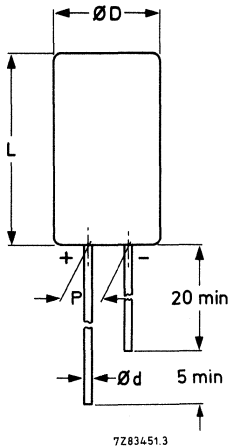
Style 1; see Table 1 for dimensions d, D, L and P.
